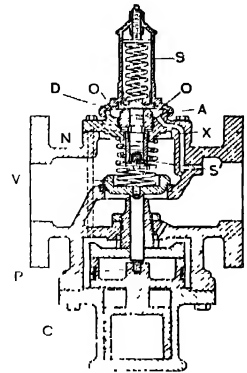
Typical Reducing Valve. (Spring-loaded Diaphragm.)
